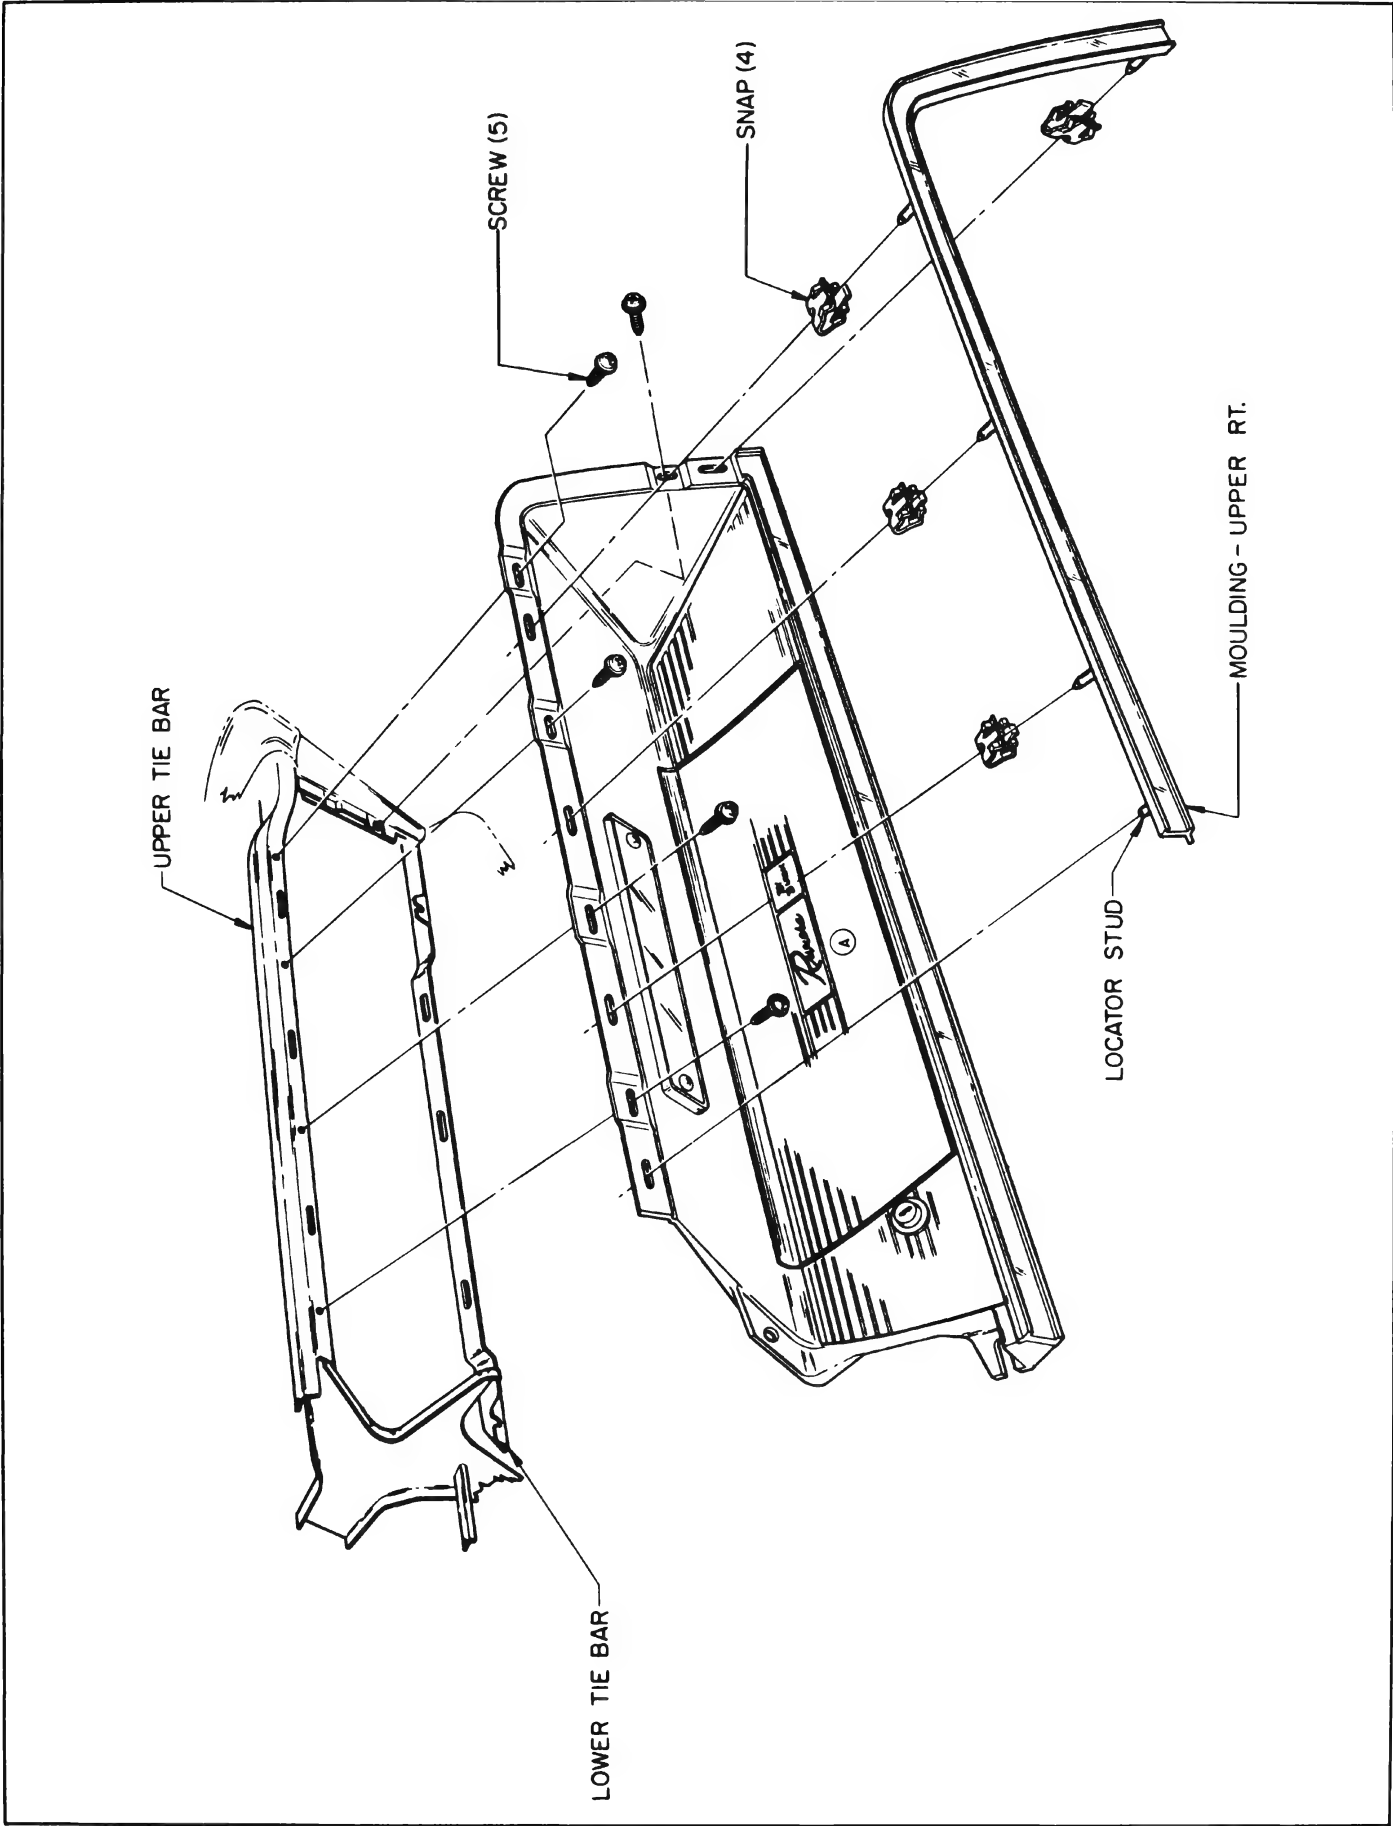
Right Center Instrument Panel Installation - Riviera
